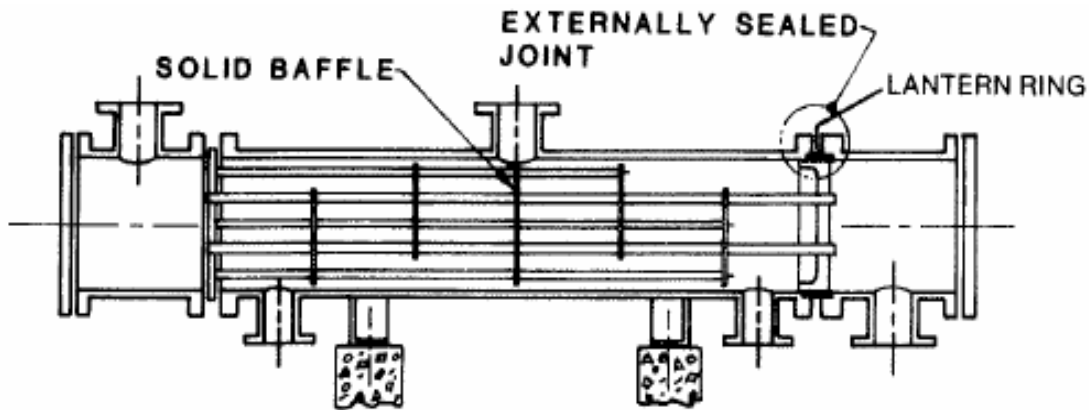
Packed Floating Head with Lantern ring, TEMA “W” Type (Singh K.P. and Soler A.I.)
